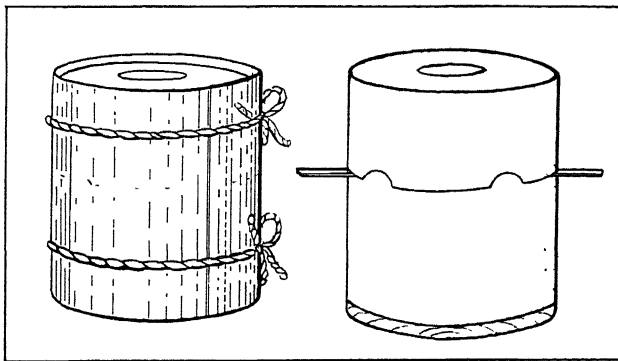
The top half is poured and the mold is separated. In separating the sections of a mold, thin wedges of steel are good or a strong case knife will do. Great care should be taken not to damage the plaster mold or the pattern.
